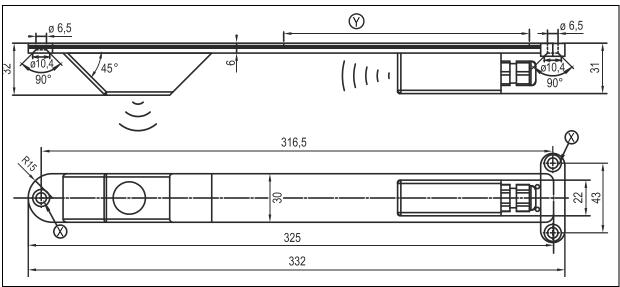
Dimensions CSMD wedge sensor V1D0
